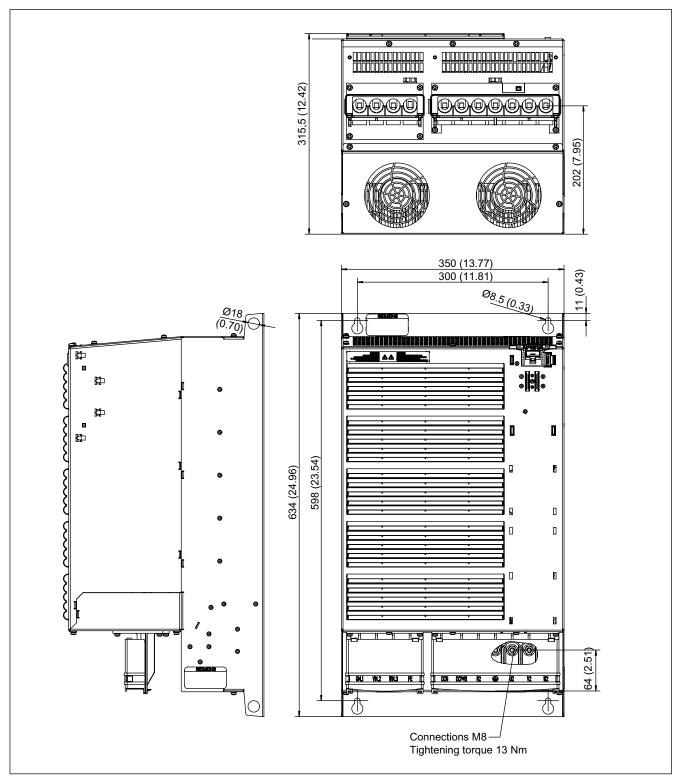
Dimension drawing: Power Module PM340, frame size FSF
